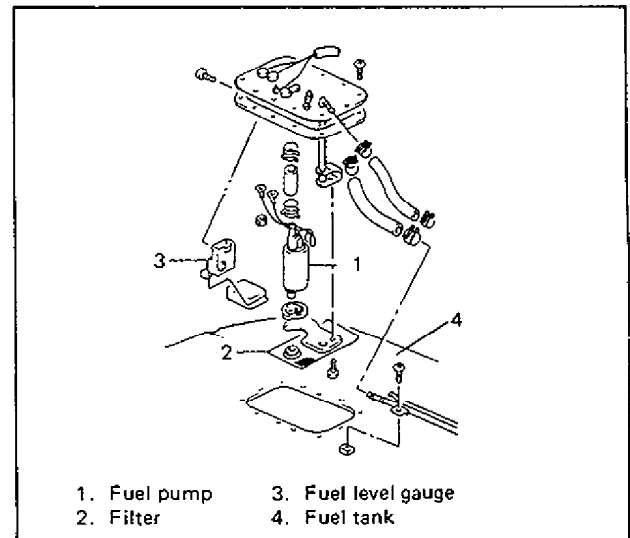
E-99 Removing Fuel Pump & Level Gauge
